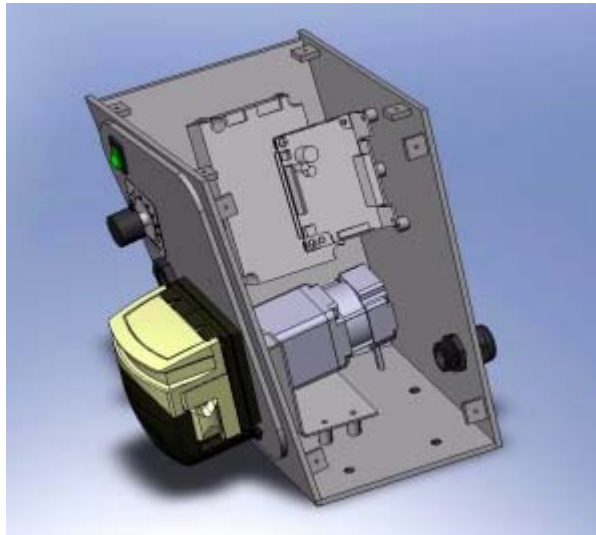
Plastic pump exposure with cover removed to show component placement.
